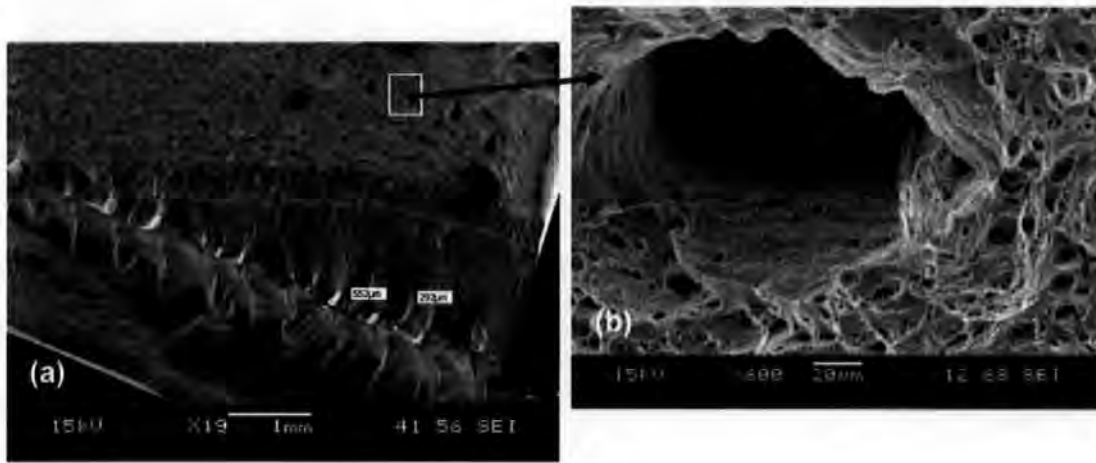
(a) Fatigue onion skin defect for weld 5 (135 mm/min, 254 rpm).
